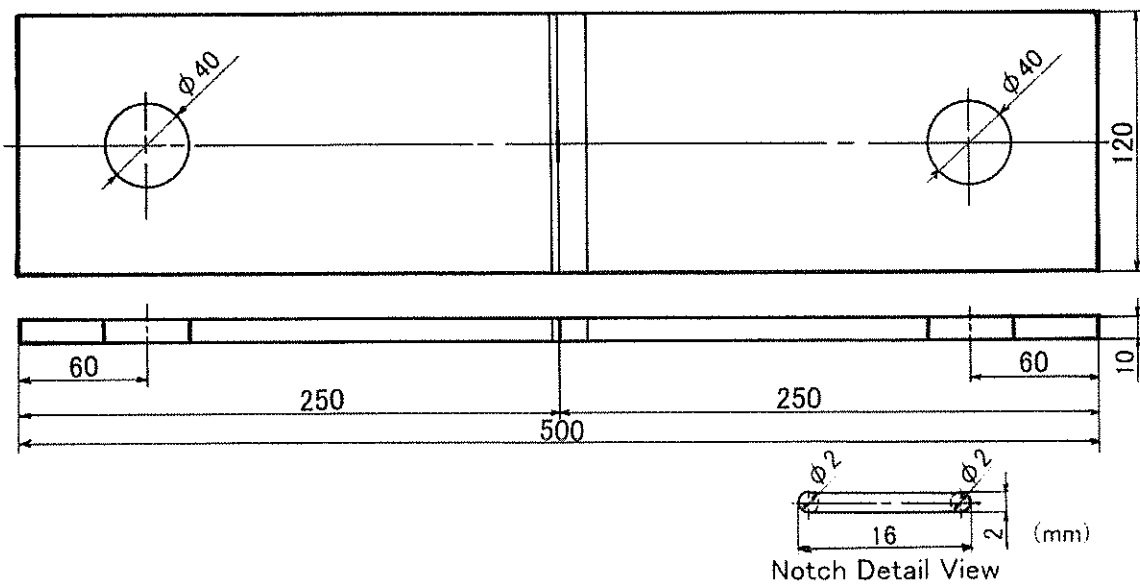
Shape and size of CCT type specimen for fatigue crack propagation test
